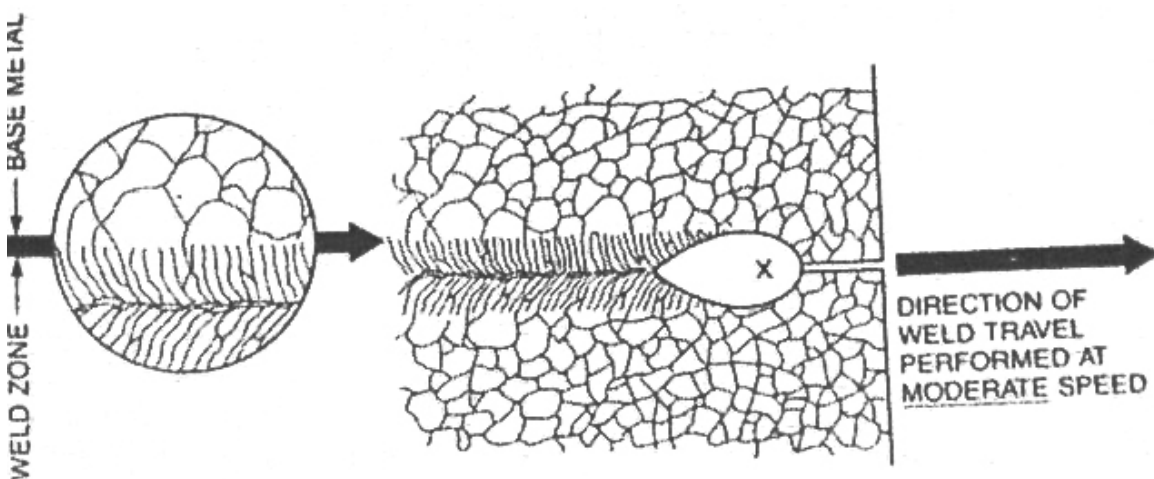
welding at moderate welding travel speed [22]
